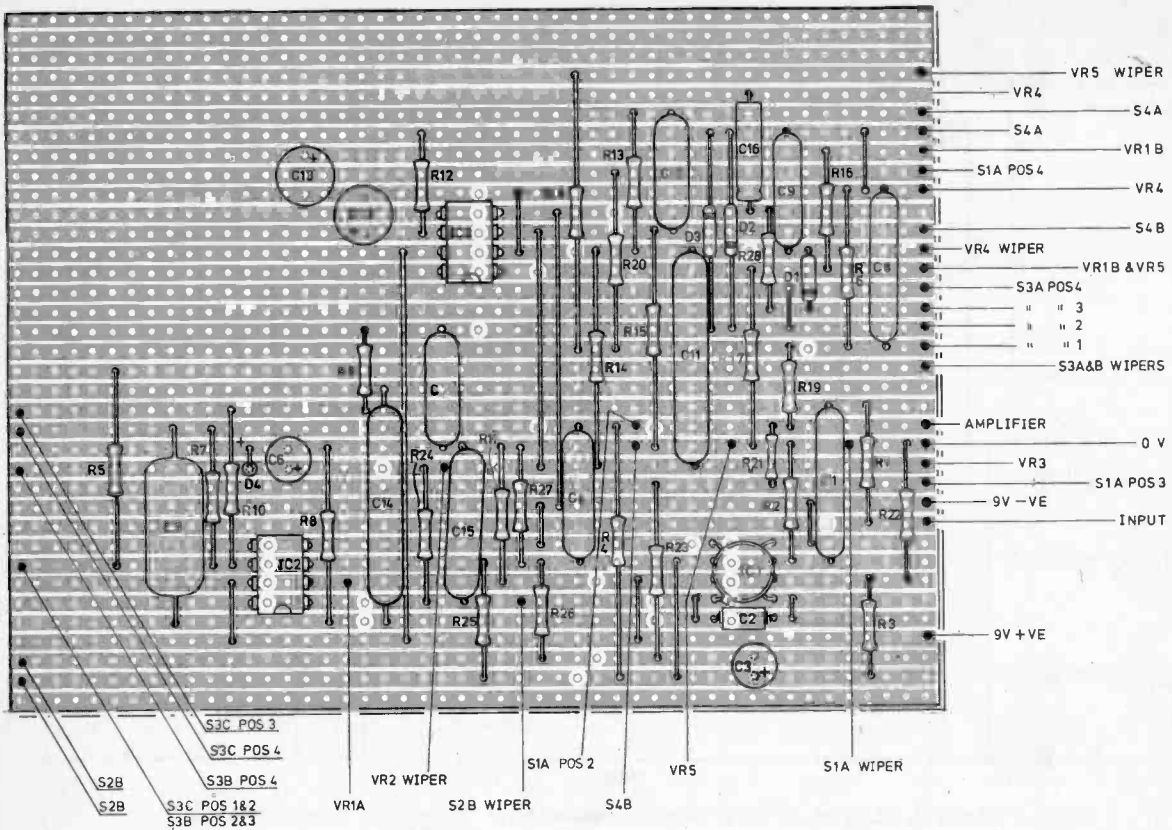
Stripboard cutting details, component layout and interwiring between the component board and panel mounted components
